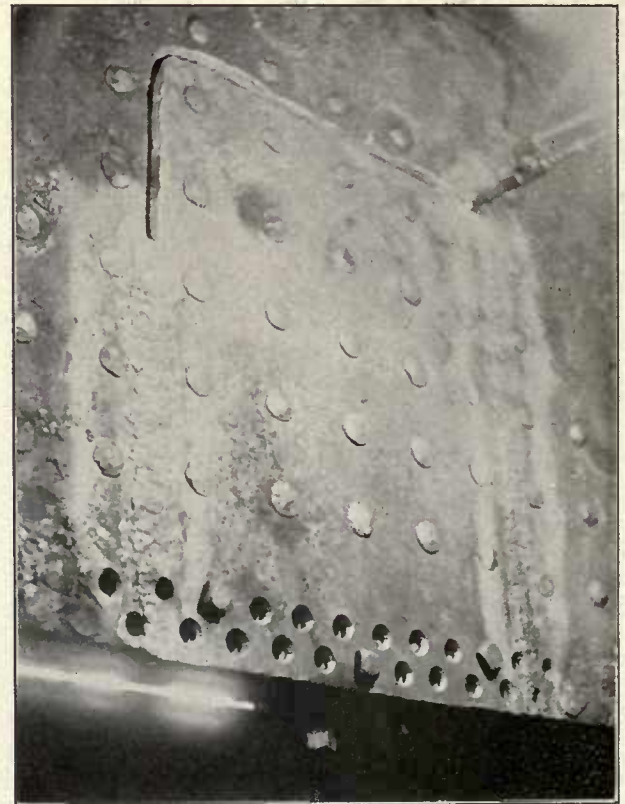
Patch Partially Welded, Showing Burner in Operation.
